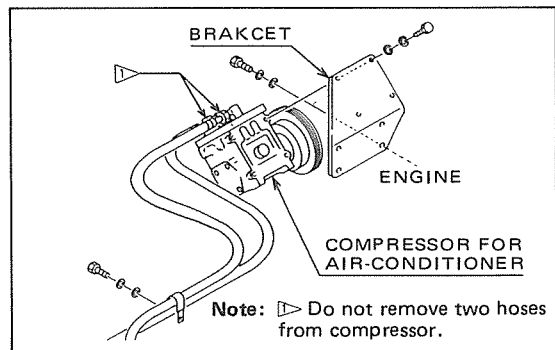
B.9 Removal of Compressor for Air-Conditioner
